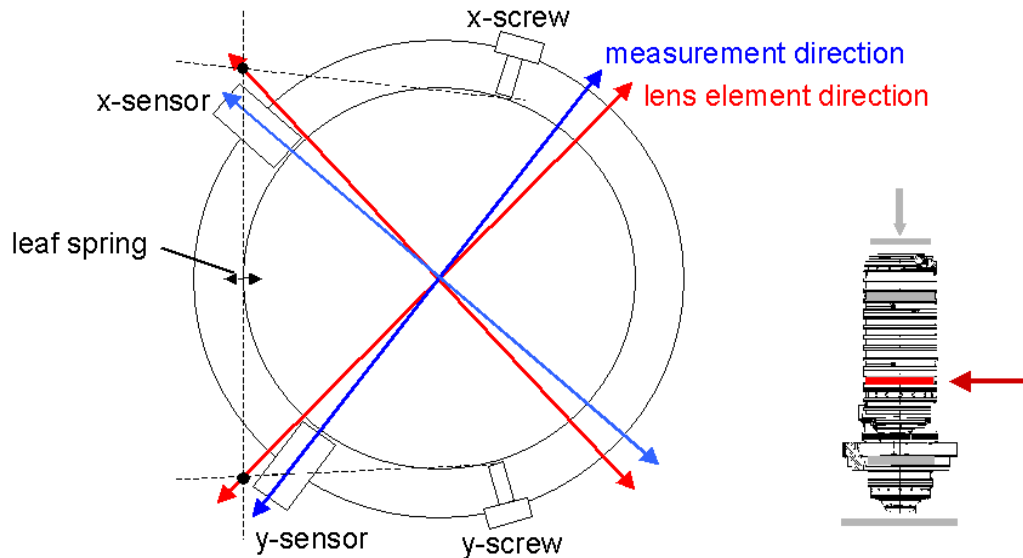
The XY manipulator contains two adjustment screws and two sensors
